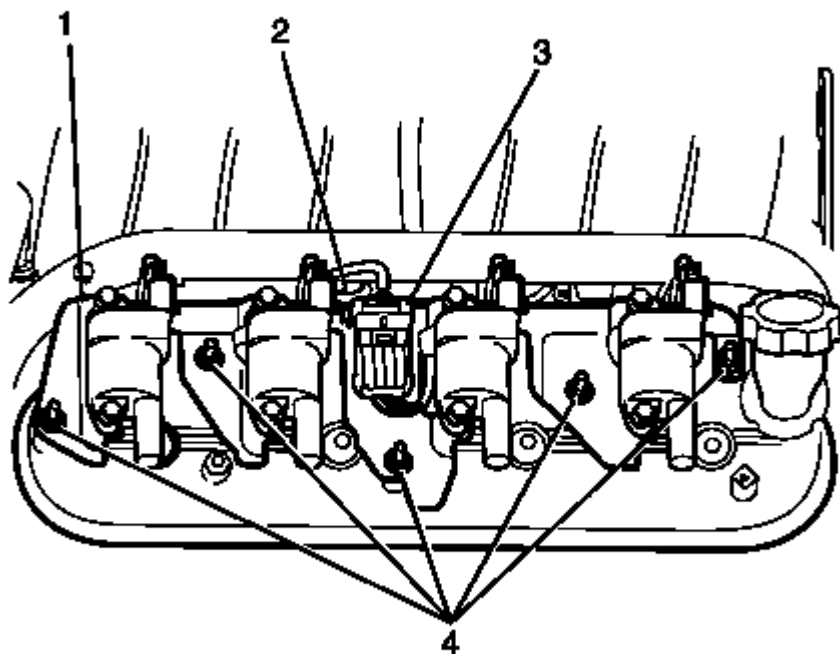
Identifying Ignition Coil Assembly To Valve Rocker Arm Cover Retaining Studs (Right Side)
